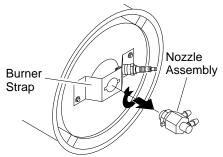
Removing Nozzle Assembly, 35/55,000 BTU/Hr Models
